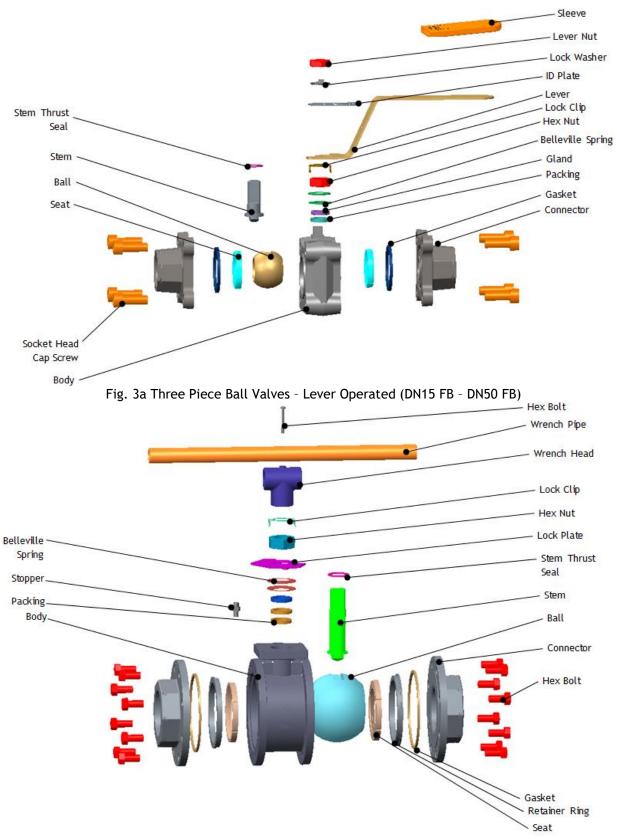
Three Piece Ball Valves - Wrench Operated (DN65 FB - DN100 FB)
